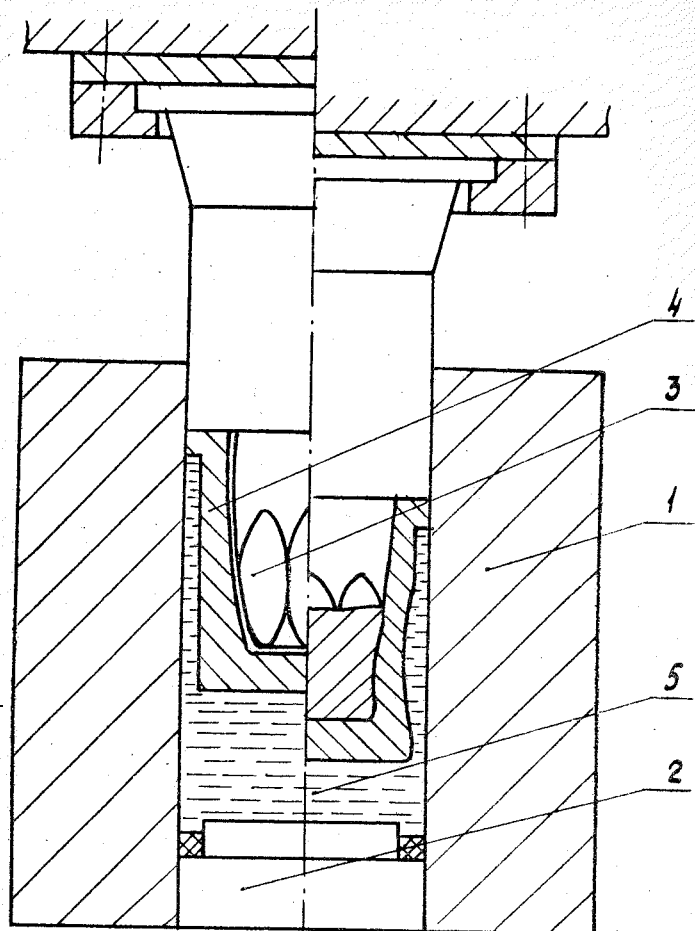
Diagram of machine for hydrostatic reducing: 1 - container, 2 - lower seal, 3 - mandrel, 4 - billet, 5 - liquid.
